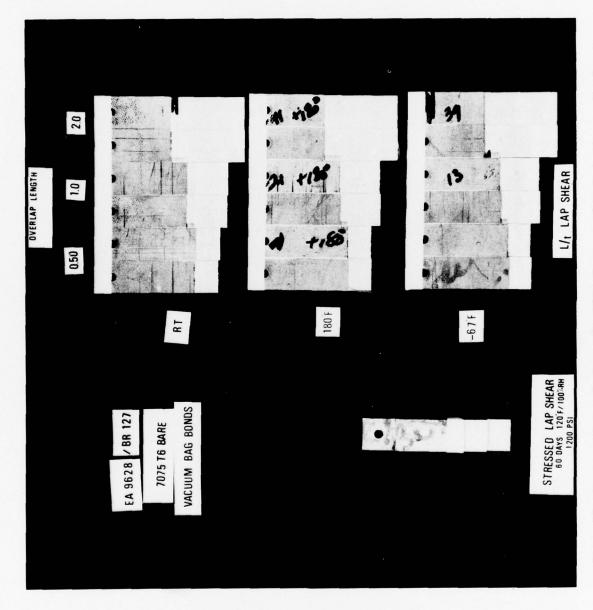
Specimen Failure Surfaces—EA 9628, Optimized FPL Etch, Vacuum Bag Bonds
